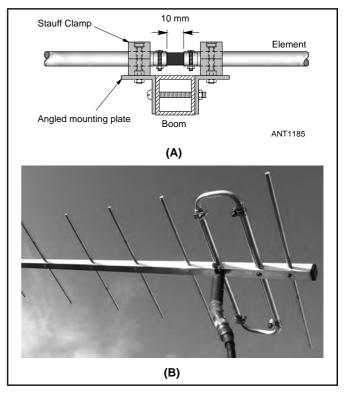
Figure A illustrates mounting the driven element feed point on a square boom using Stauff clamps and angled mounting plate. At B, the driven element loop is mounted using through-the-boom construction.
